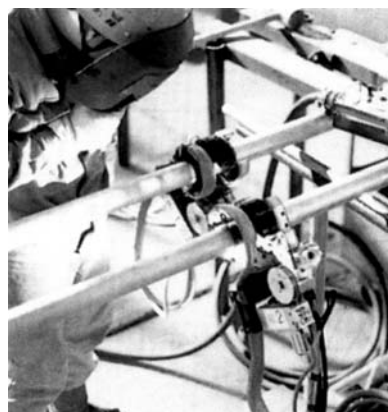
Automatic GTAW of tube-to-tube butt joints is a typical application for TGS-90B3
